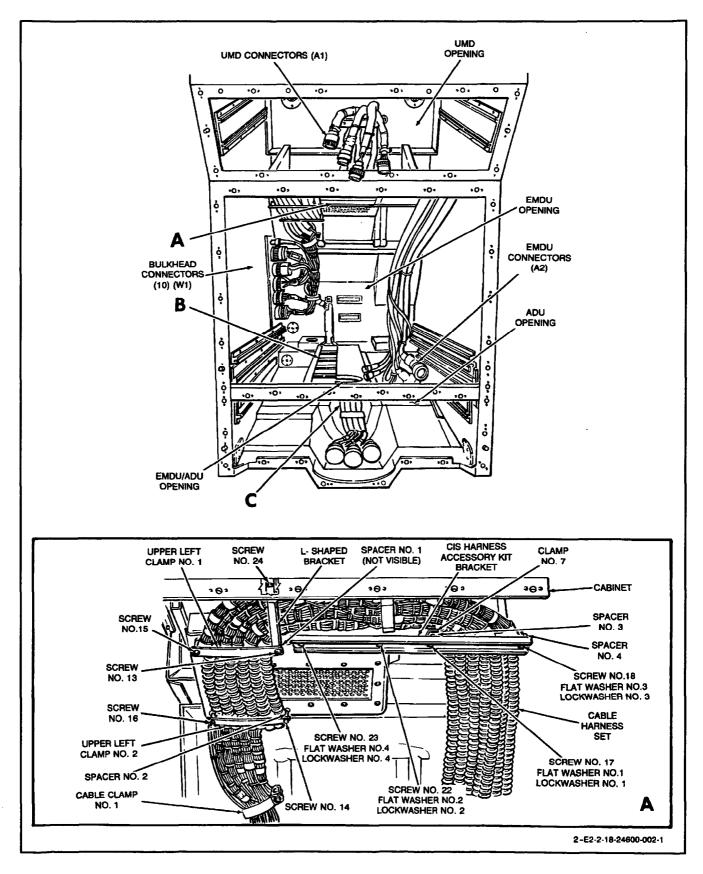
Removal and Installation of Cable Assembly Set OD-214/APQ-179 (Sheet 1 of 2)
